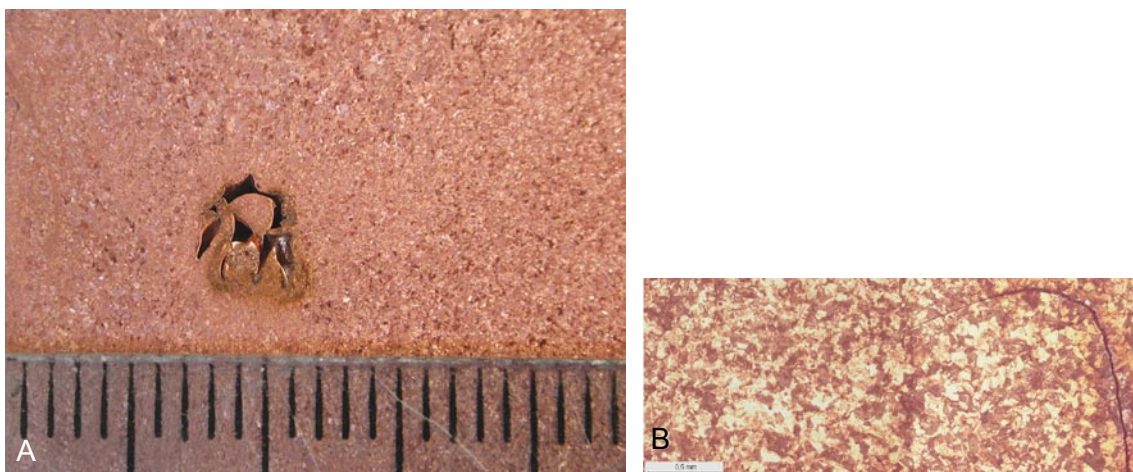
Possible discontinuities in the welding part. (a) wormholes and (b) joint line hooking.
